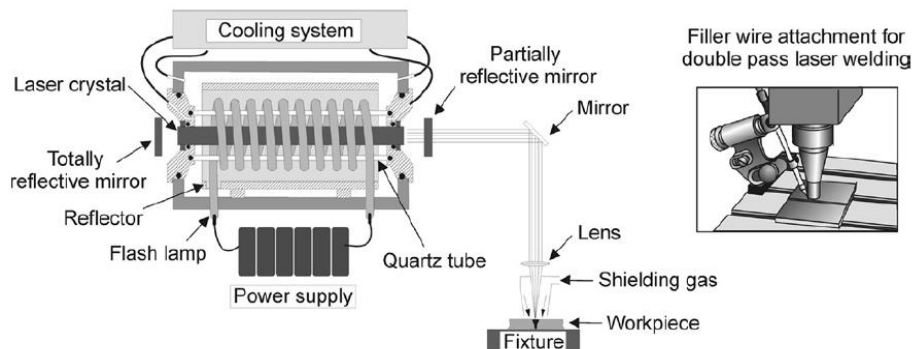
Laser-beam Welding Equipment (Swift & Booker, 2013)
